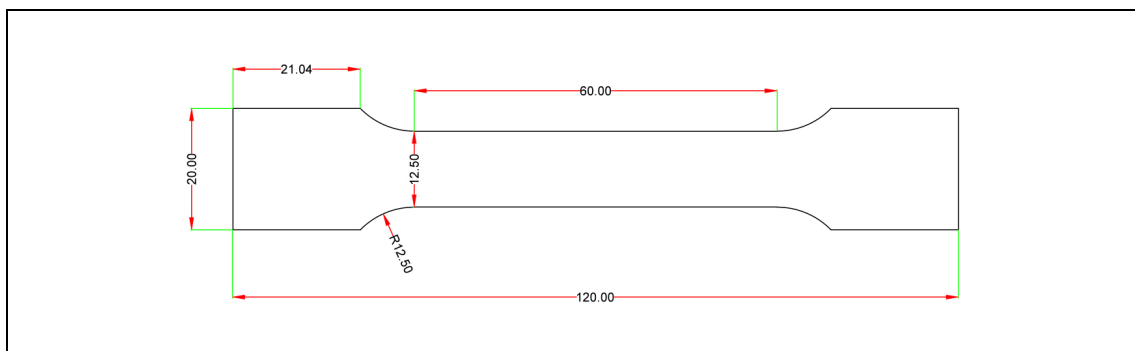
Geometry and dimensions (mm) of flat specimens for tensile testing [50]. Thickness 3 mm.
